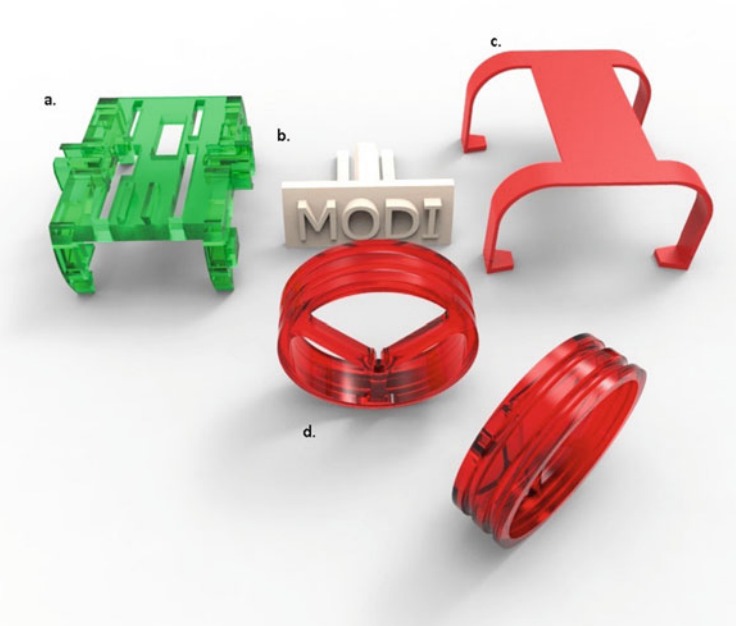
Four pieces forming the mechanical hardware of MODI: a chassis, b logo, c extension and d the two wheels. Once everything is assembled, MODI has a diameter of 96 mm and a height of 50 mm
